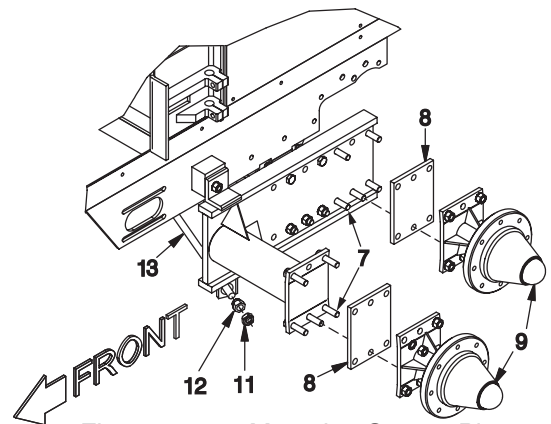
Mounting Spacer Plates, Hubs & Truss Rod
